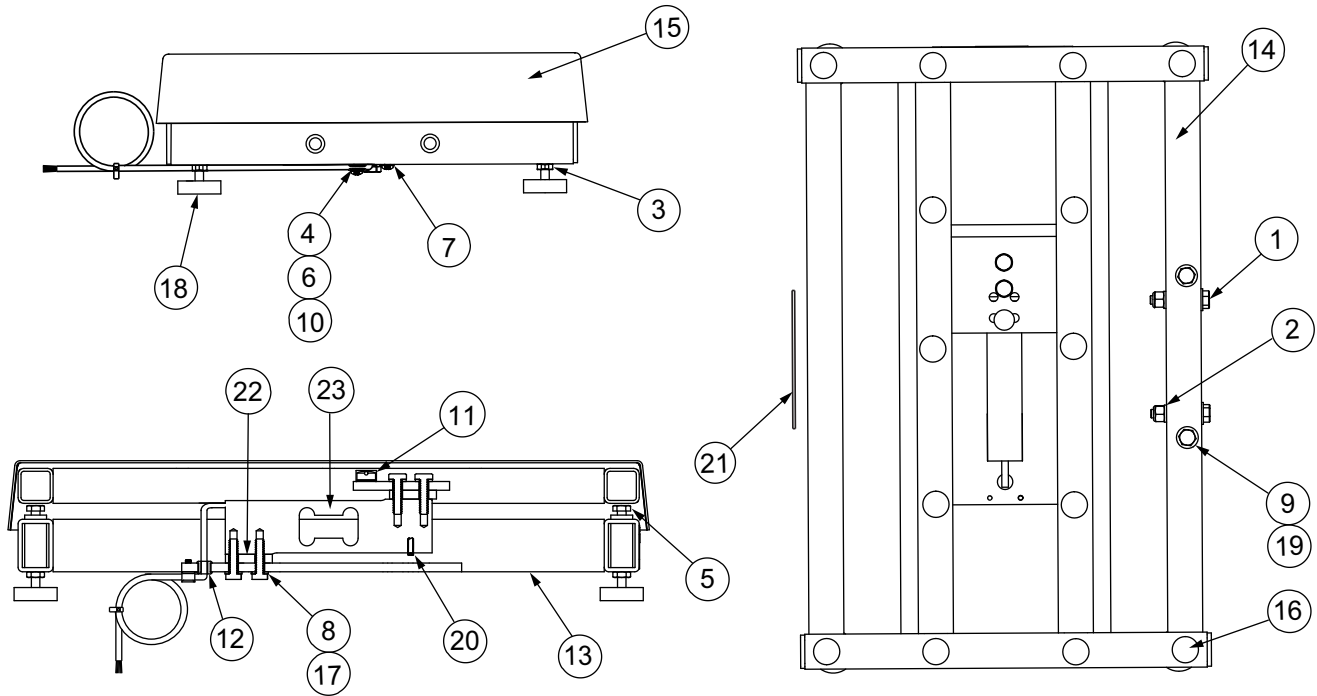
12" x 18" Stainless Steel Parts Illustration
